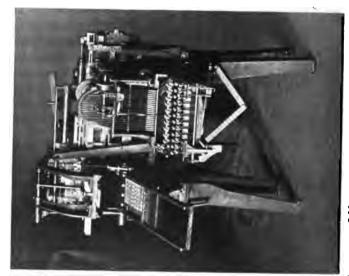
Oddur type-bar machine; first model, using a matrix-dish and casting a grooved base upon a line of short type.
